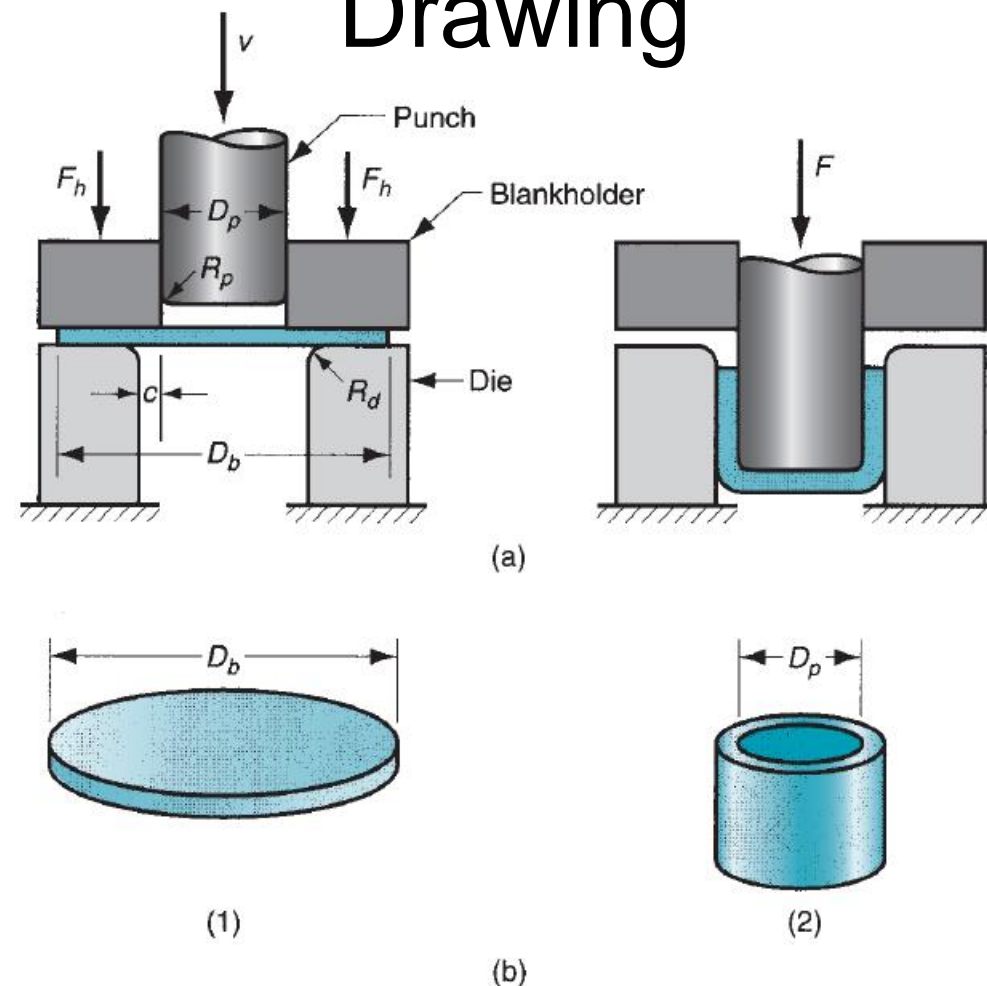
(a) Drawing of a cupshaped part: (1) start of operation before punch contacts work, and (2) near end of stroke; and (b) corresponding workpart: (1) starting blank, and (2) drawn part. Symbols:  $c$  = clearance,  $D_b$  = Blank diameter,  $D_p$  = Punch diameter,  $R_d$  = die corner radius,  $R_p$  = punch corner radius,  $F$  = drawing force,  $F_h$  = holding force.
